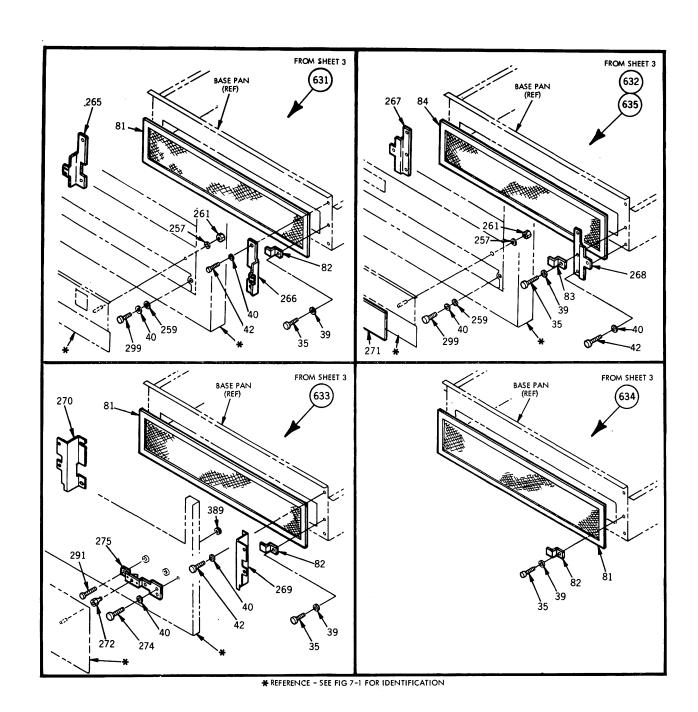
POWER SUPPLY ASSEMBLY
